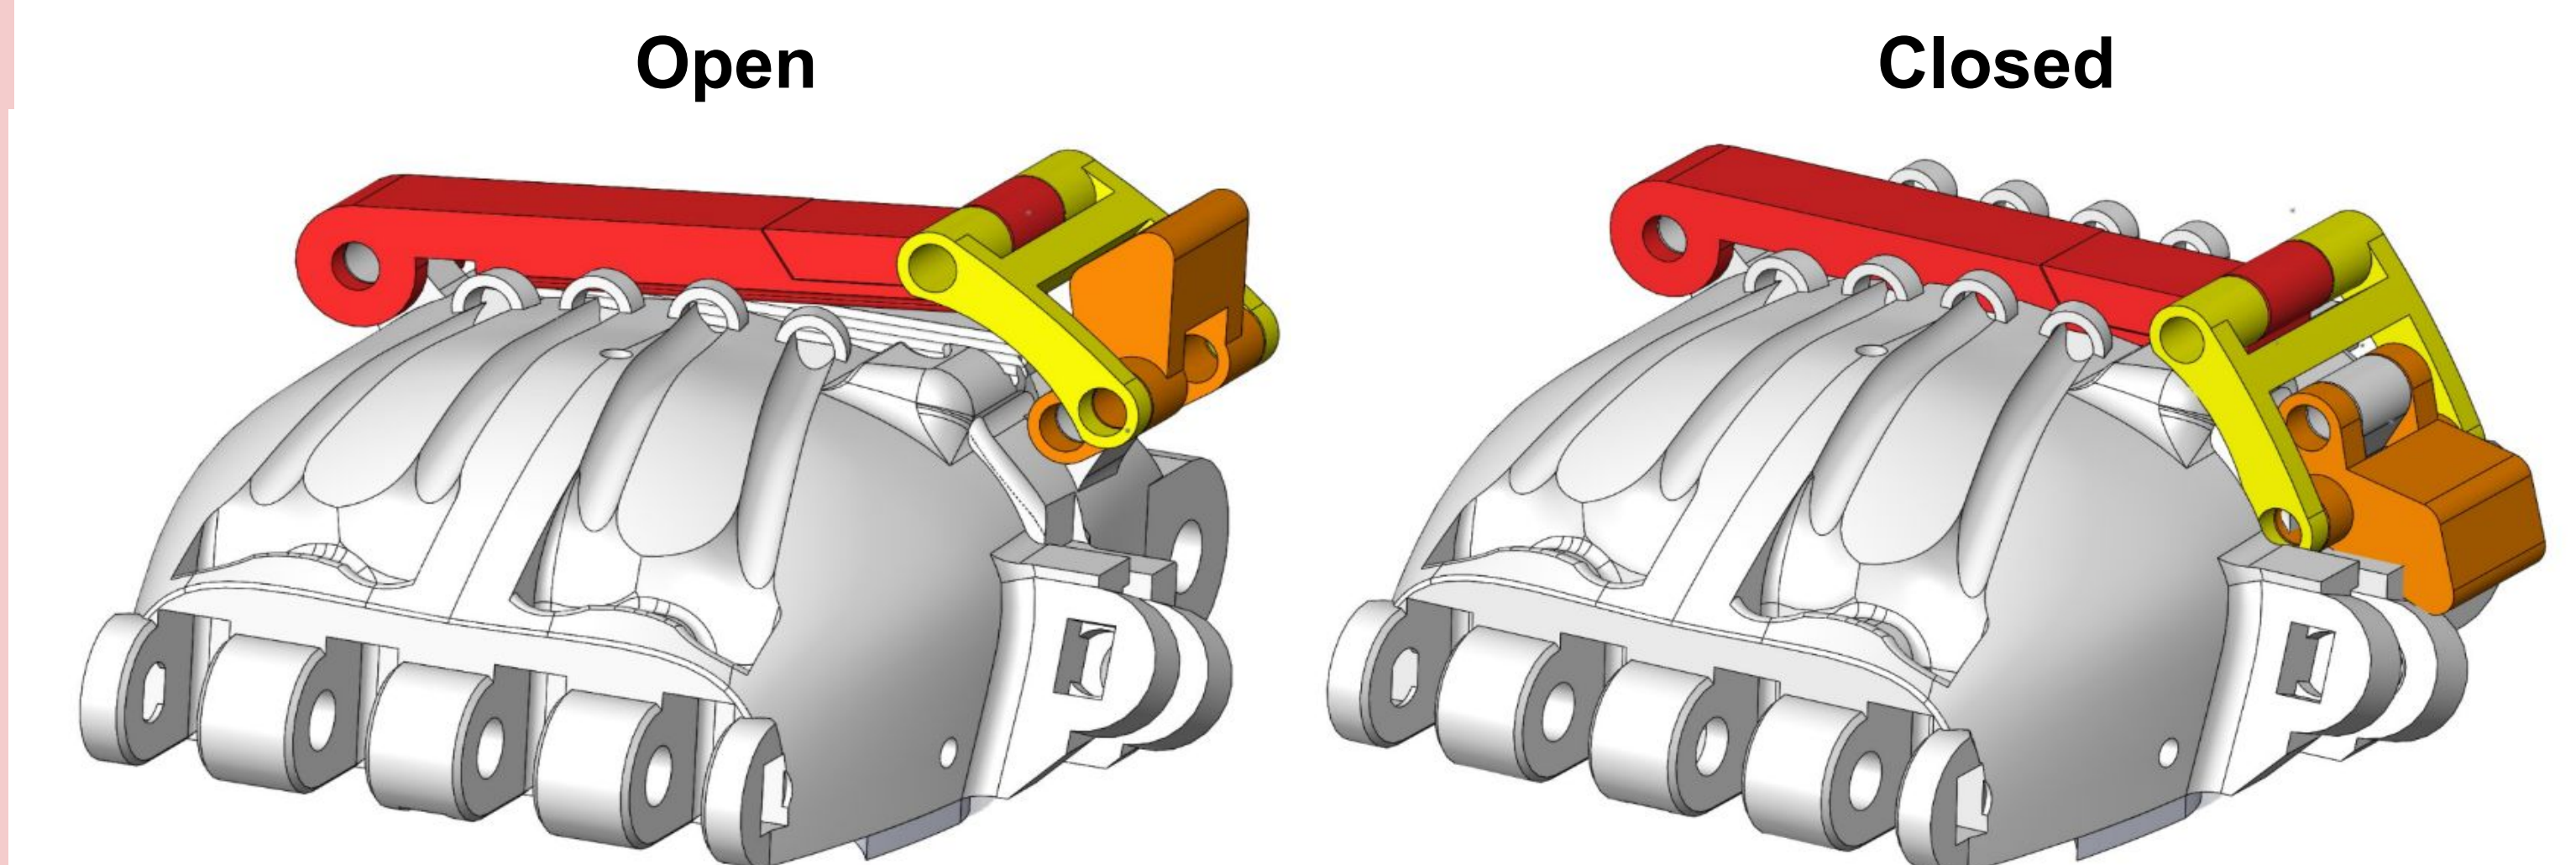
SolidWorks drawing of final design with the clamp open (left) and closed (right).
